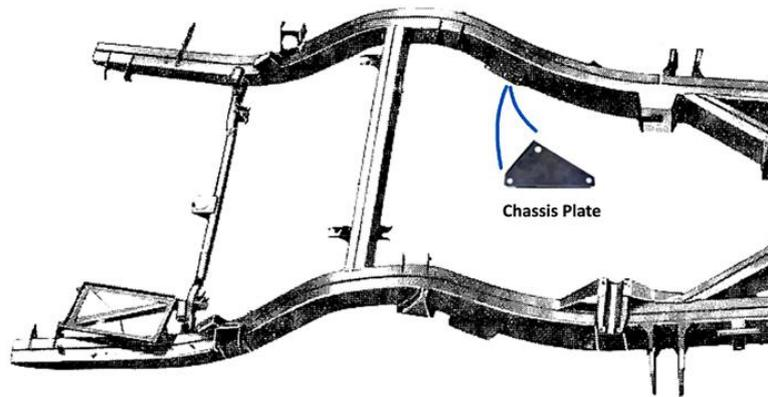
Fixing the Chassis to Rear Anti-Roll Bar Plate
